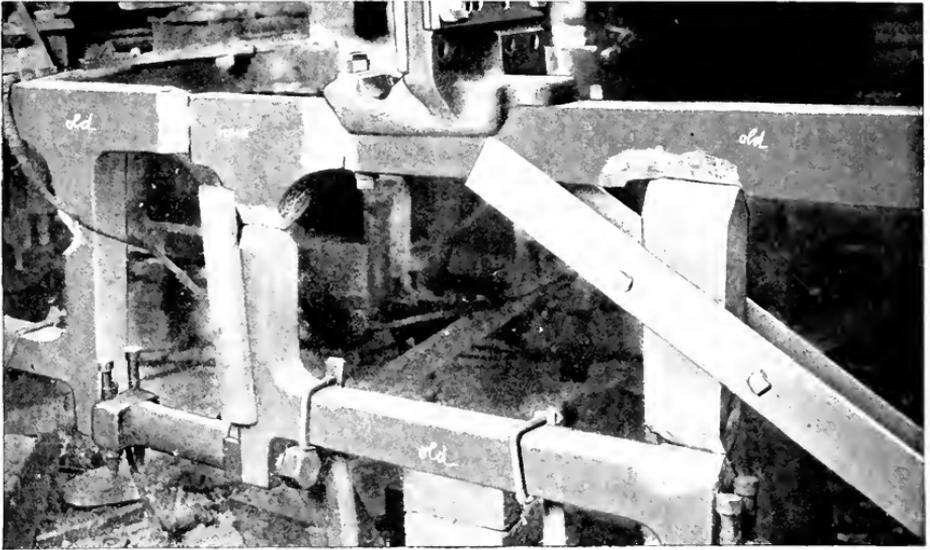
Right Side Frame of Locomotive with Breaks Prepared for Welding; Work Done with Locomotive Assembled
